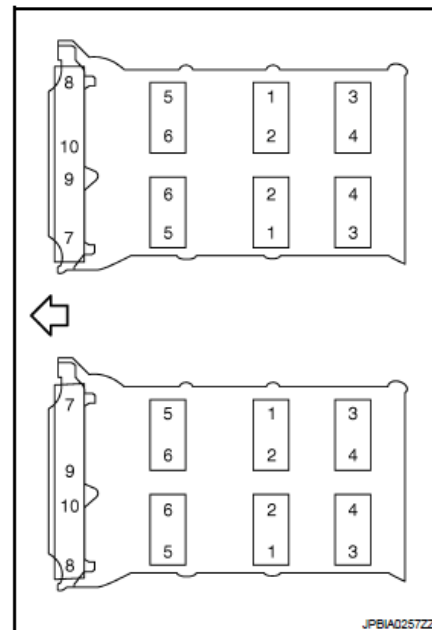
Identifying Intake And Exhaust Camshaft Brackets Installation Position
